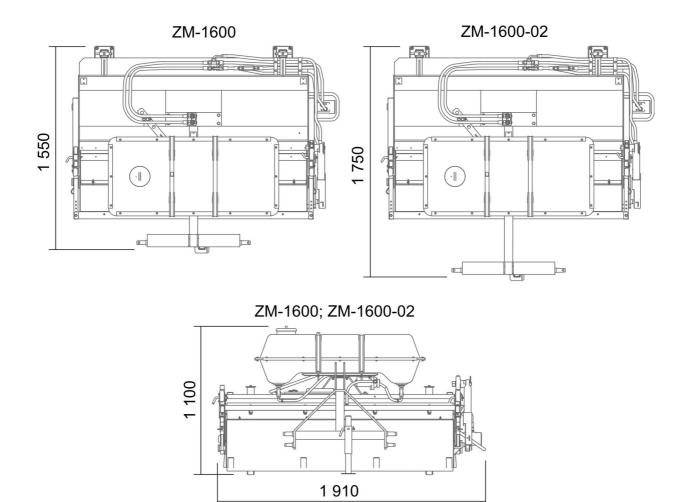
A External dimensions of ZM-1600; ZM-1600-02 sweepers
